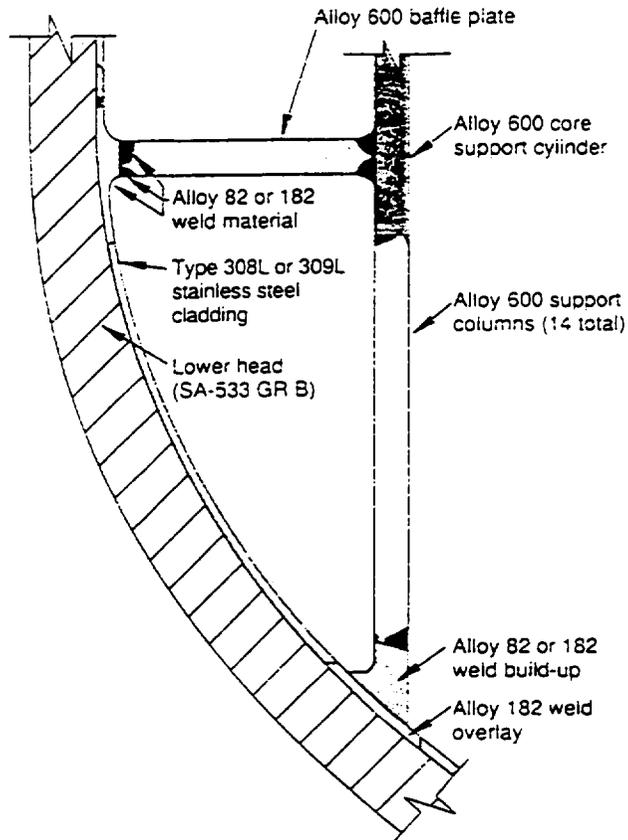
Typical core shroud support materials and weldments.
